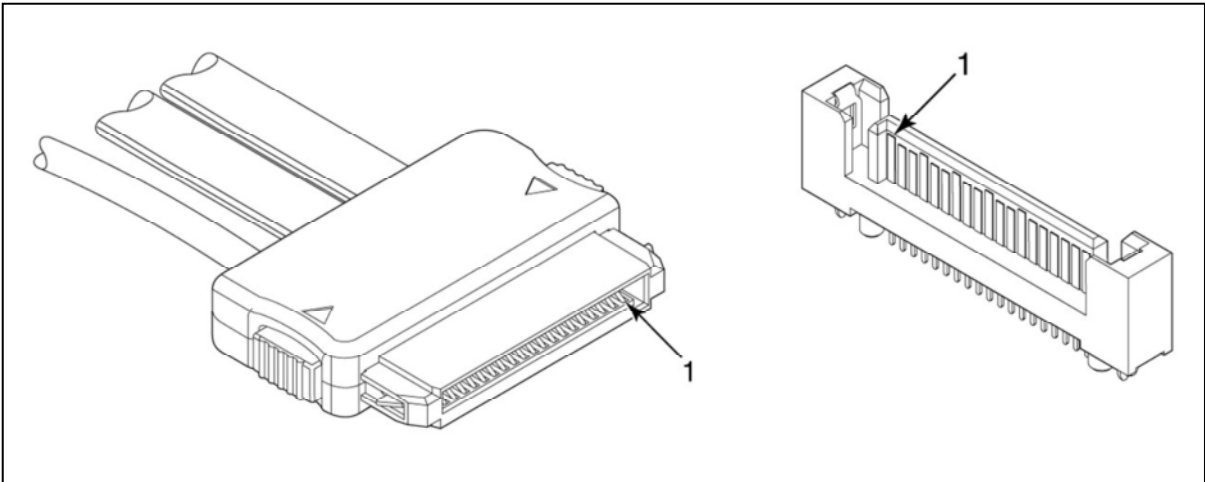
Isometric drawings of the internal 2 Lane cable and connector
